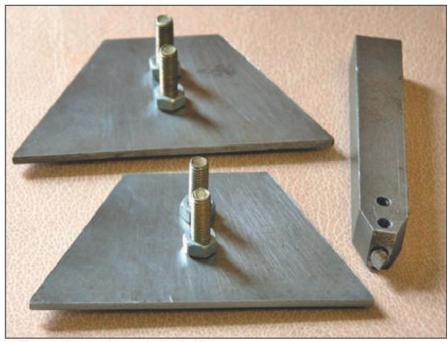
shows a typical grinding setup. Don't confuse the tool grinding holder with the external threading tool; they are not the same. The tool grinding holder is used to hold the tip for grinding, and is used to grind both the internal and external threading tips.
